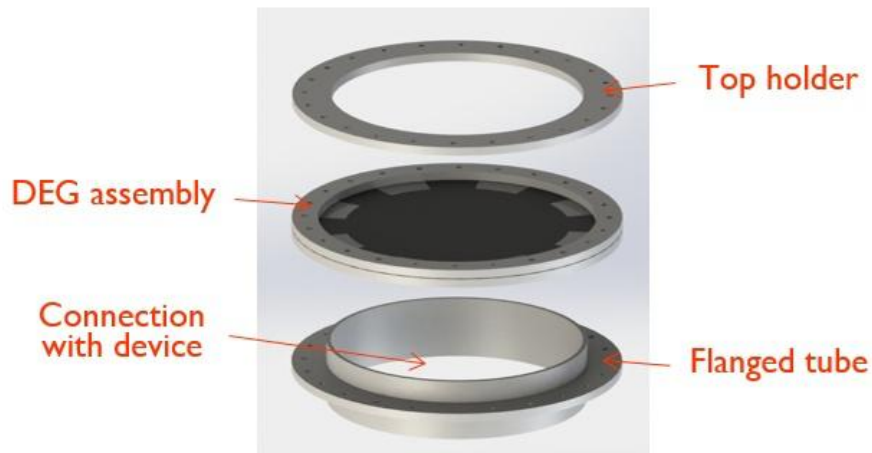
DEG STACK PRE-STRETCHING ON HOLDING FIXTURE
